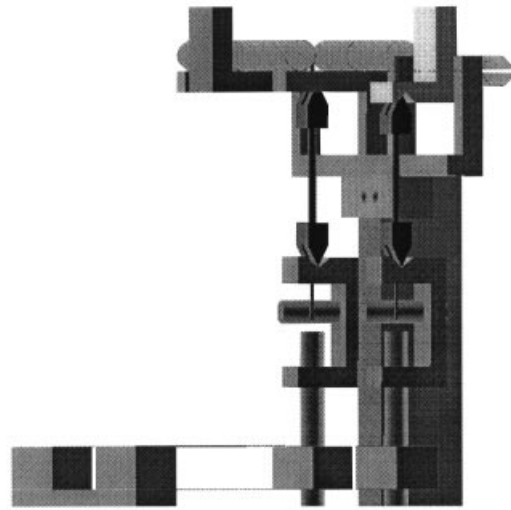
Solid model of voice coil actuator suspensions and the push-pull mechanisms. The horizontally-oriented pegs that anchor the push-pull rod cable can be turned to pretension the cable and thus eliminate potential backlash.
